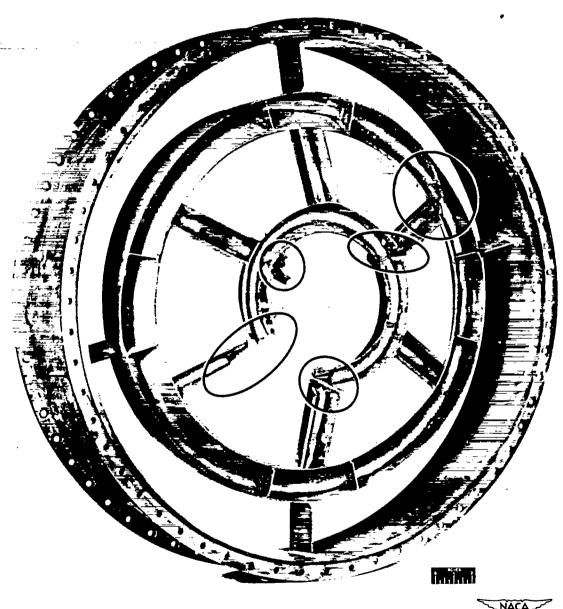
Typical V-gutter failure at gutter intersections and in sheltered region.
